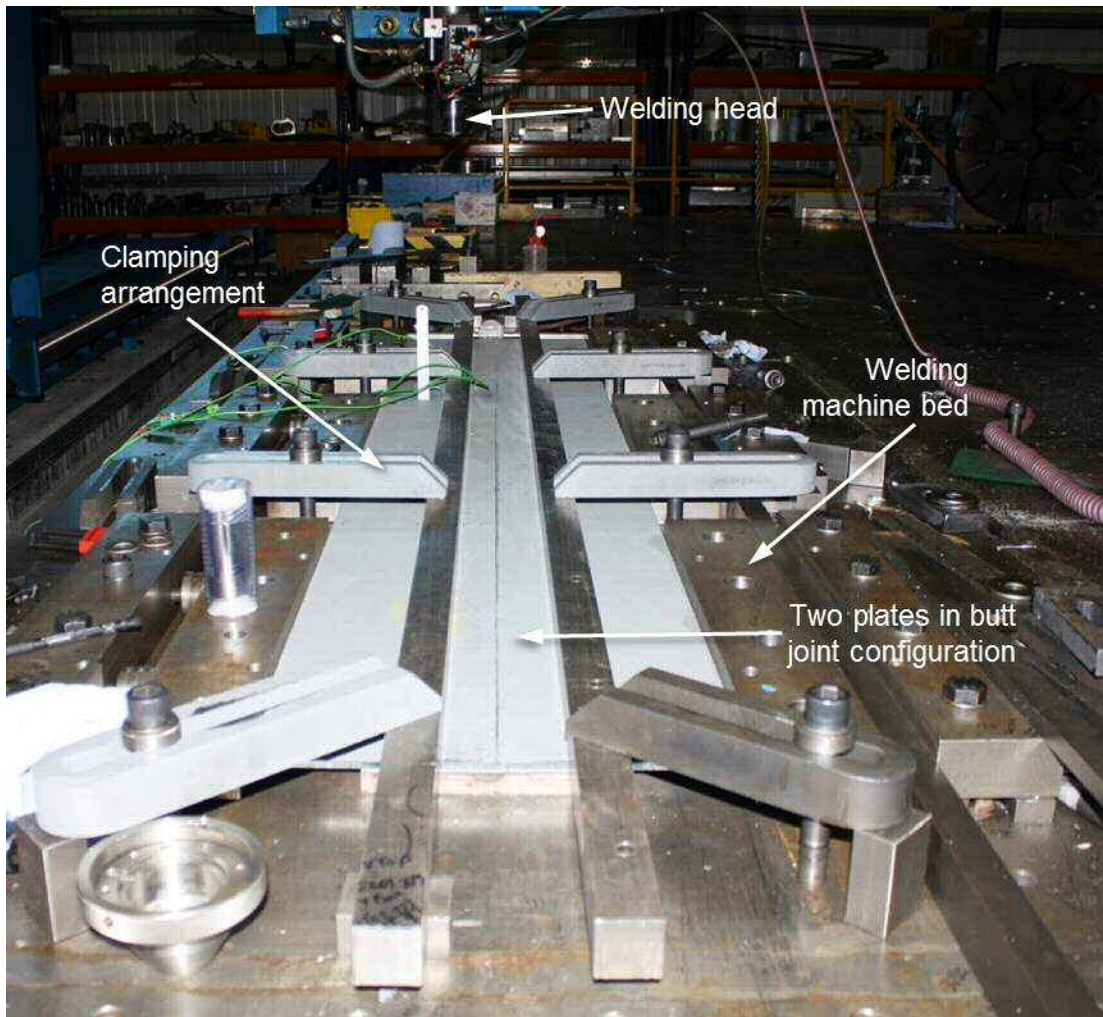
General view of the FSW machine and experimental setup prior to welding
